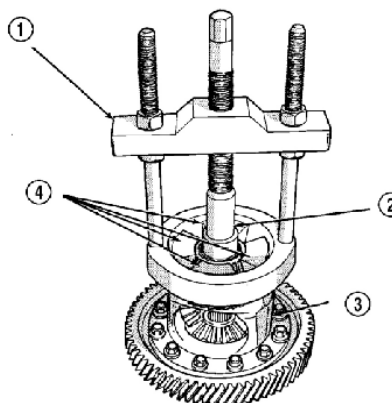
Disassembly differential bearing taper sleeve along the edge of differential casing
